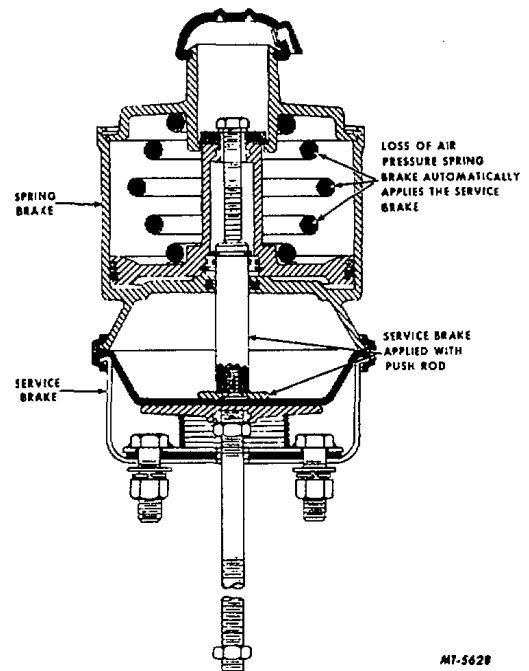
Parking Brake in the Applied Position with Service Brake Applied through Parking Brake Push Rod (Loss of Air Pressure).
